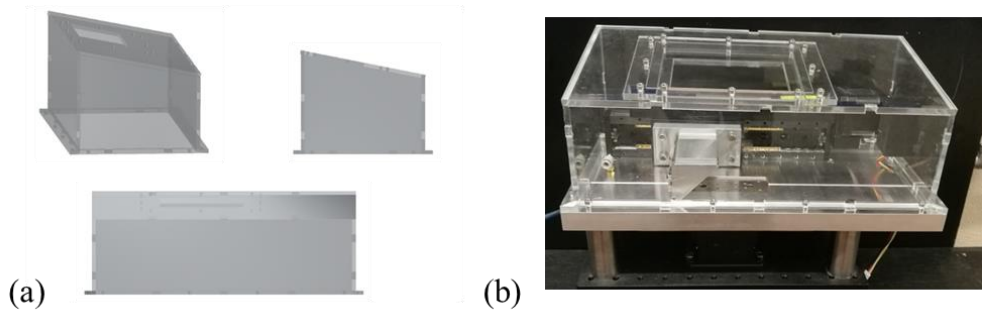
a) 3D CAD model of gas shield design, b) manufactured gas shield mounted on the system.
